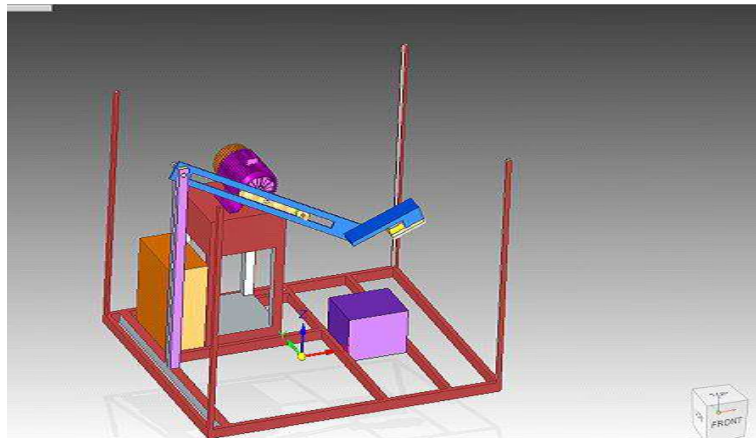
Model of a Duster Cleaning Machine by Hammering Duster.
